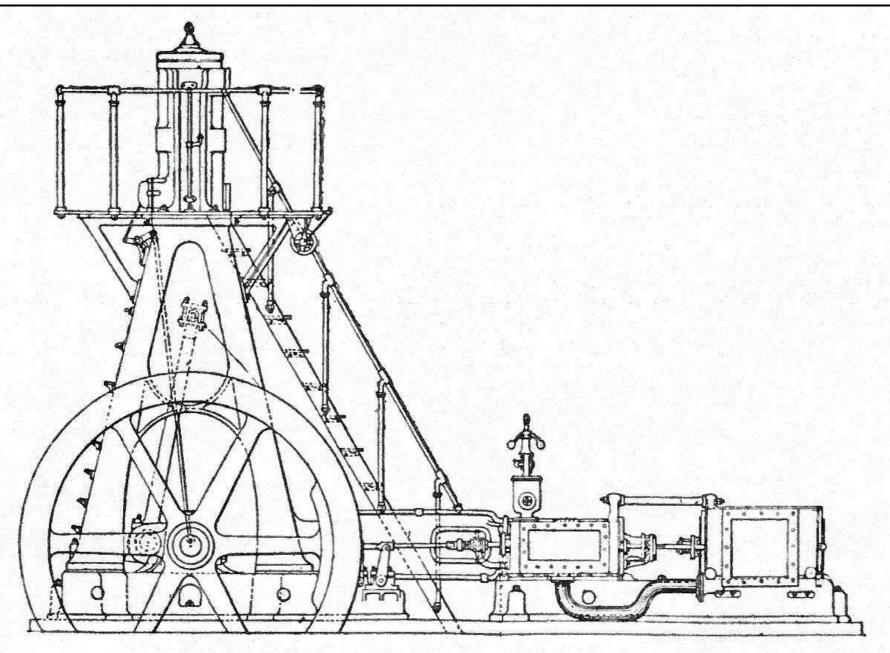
Double-Acting Vertical Type De La Vergne Ammonia Compressor and Horizontal Tandem Condensing Engine. Side Elevation of Complete Machine.
